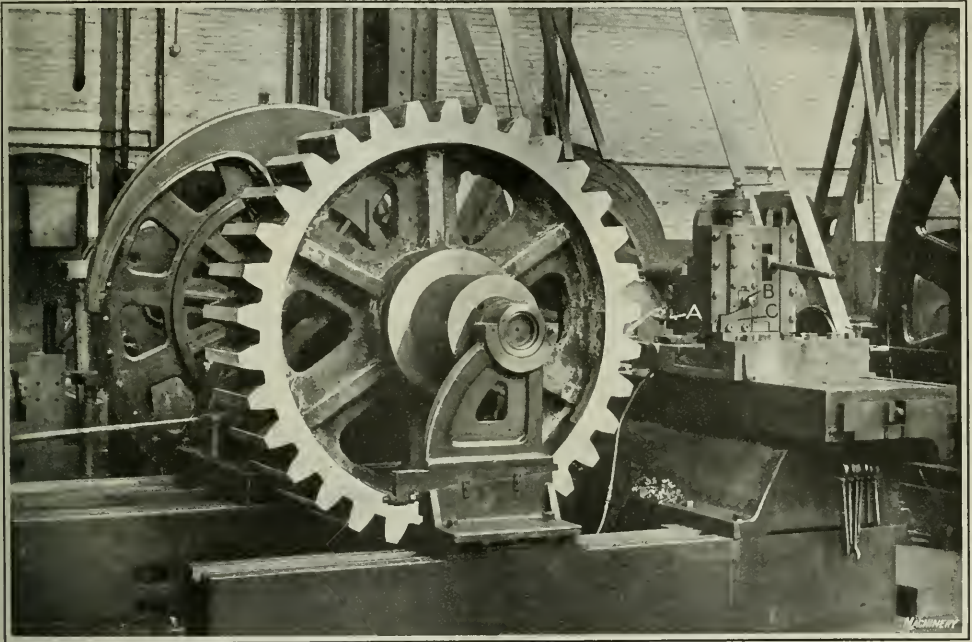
Gear Planer of the Templet or Form-copying Type with Finished Spur Gear in Position
